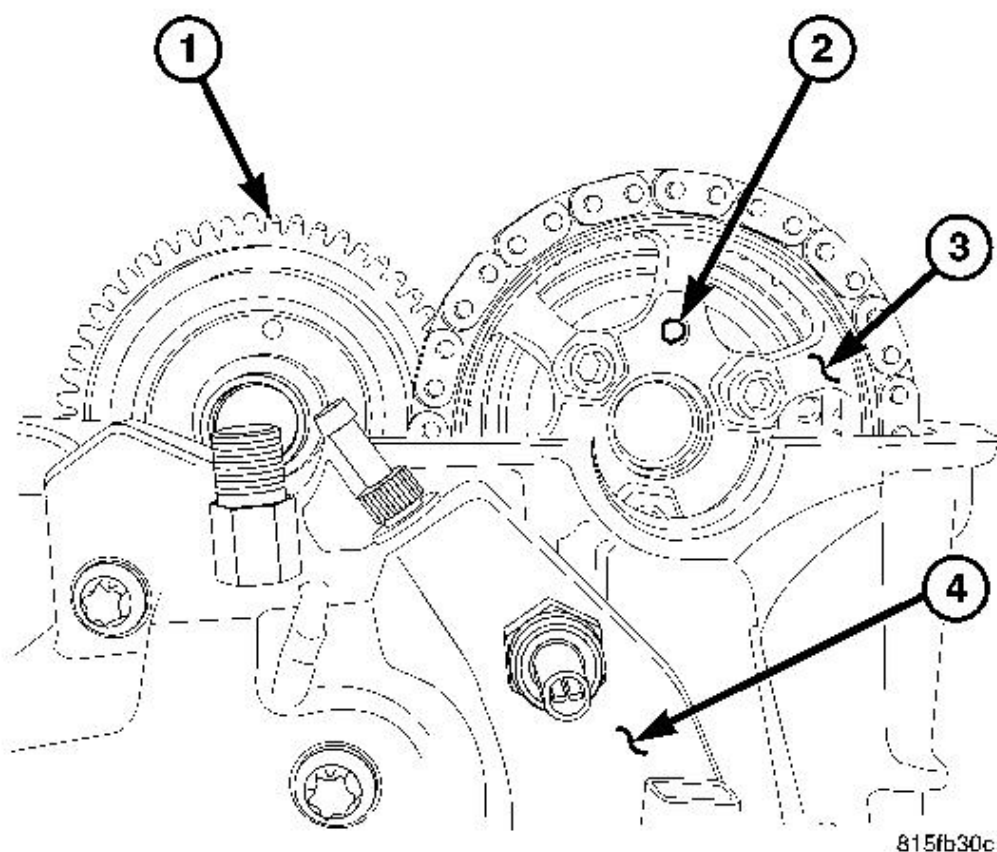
Left Exhaust Camshaft Drive Gear Alignment Dowel
